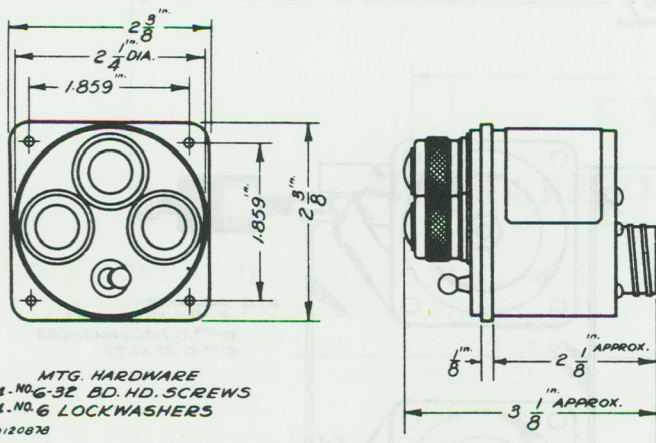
Mounting Dimensions of Type IN-5A Indicator
